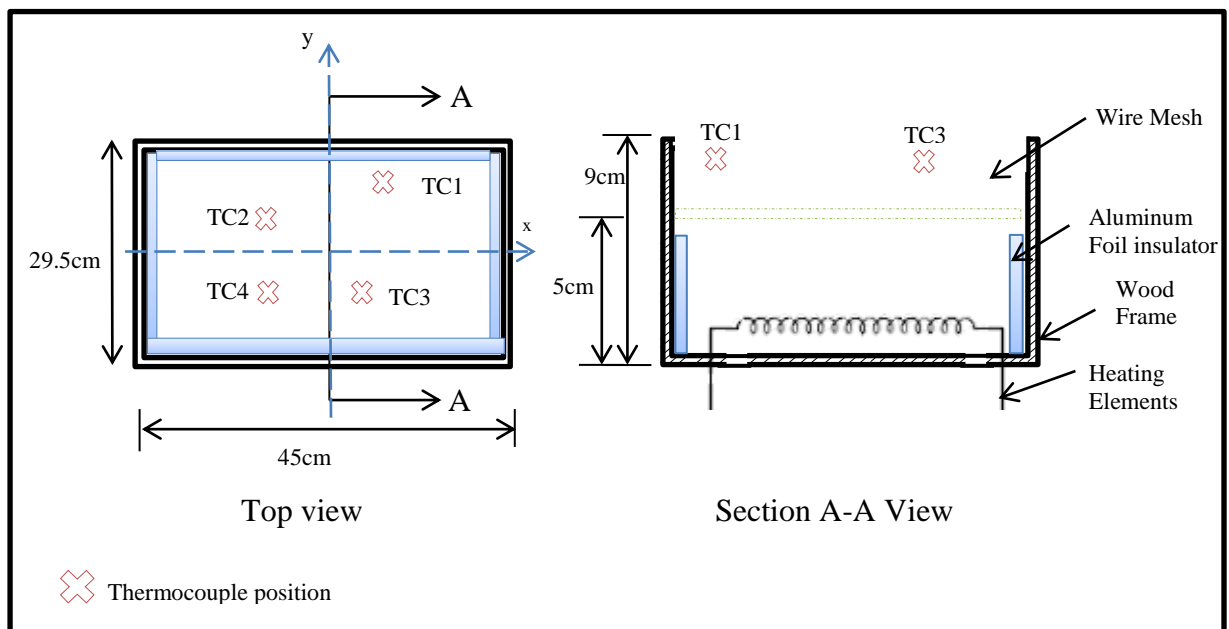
Thermocouple Position for Experiment 2 on Thermoforming Equipment Heating section.
